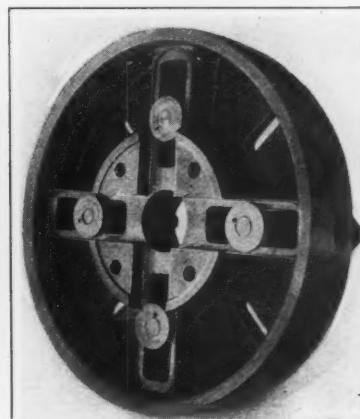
Opposite Side of Simplex Four-jaw Chuck
